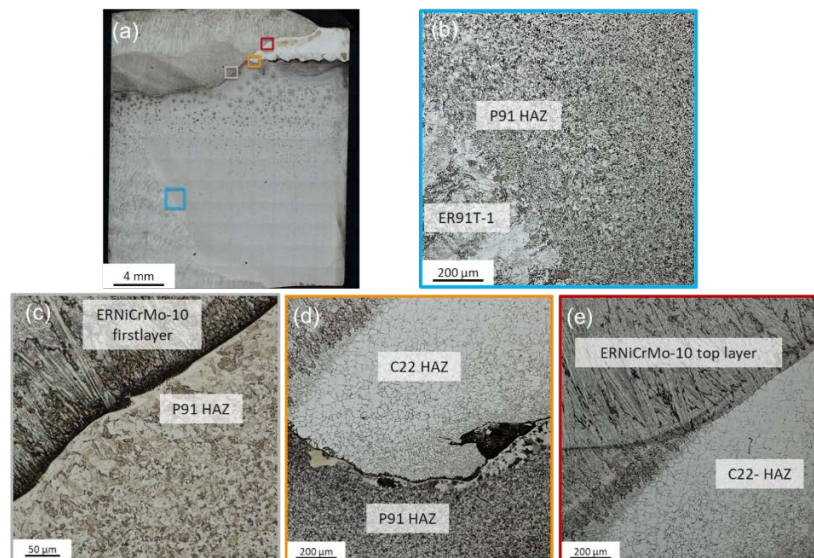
(a) Cross-sectional macrograph of Gr.91-C22 weld, and the magnified micrographs in (b) interface between ER91 FZ and Gr.91 HAZ; (c) interface between ERNiCrMo-10 first clad weld layer and Gr.91 HAZ; (d) intersection of ERNiCrMo-10 pass, C22 HAZ, Gr.91 HAZ, and EXW bond; (d) interface between Gr.91 HAZ and C22 EXW bond; and (e) interface between the top two layers of ERNiCrMo-10 and C22 HAZ
